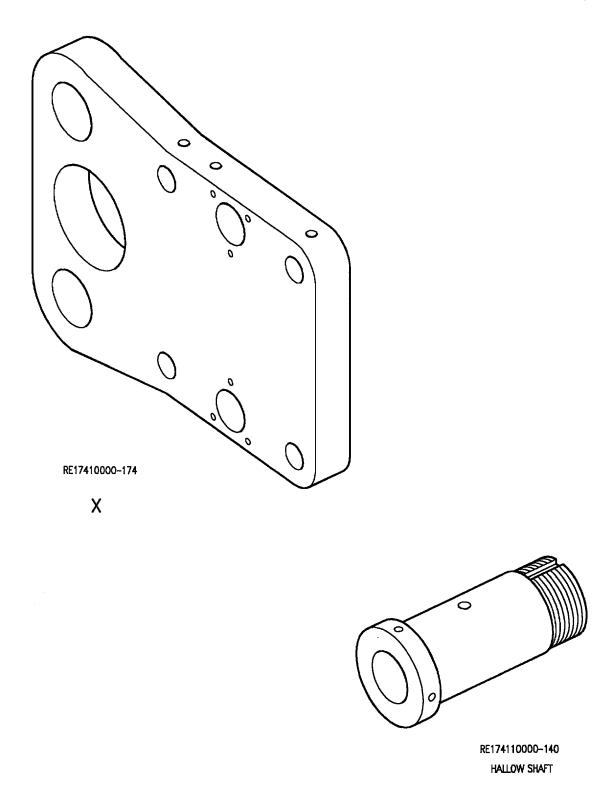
Setting Up to Machine I.D. of Bushing or Lug at Location 1, Y453.000 (Sheet 7)
